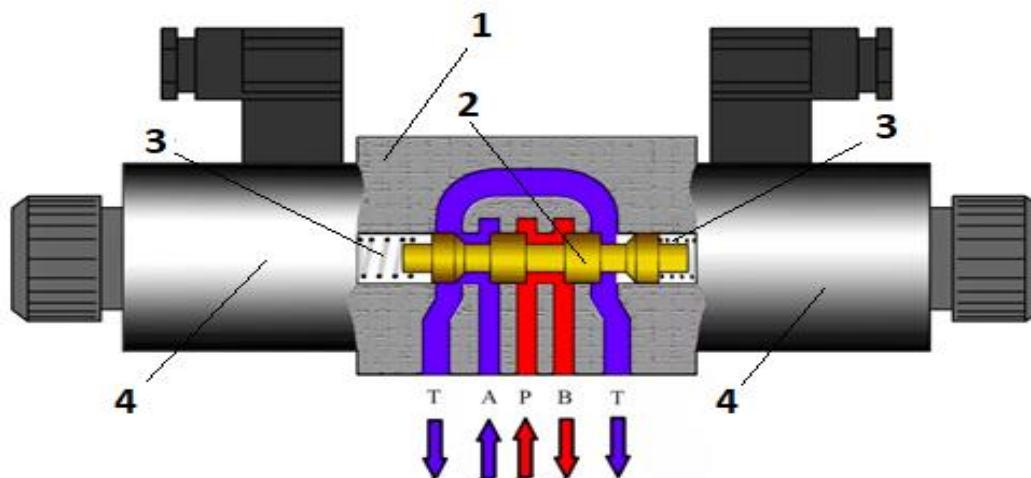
Principle of operation of a three-position, four-line hydraulic distributor: 1 – body; 2 – spool; 3 – springs; 4 – electromagnet
